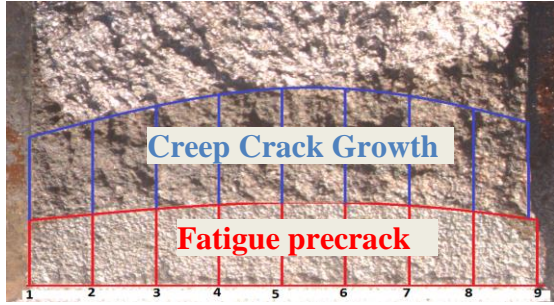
Fracture surface after Creep Crack Growth tests and schematic for crack length measurements.
